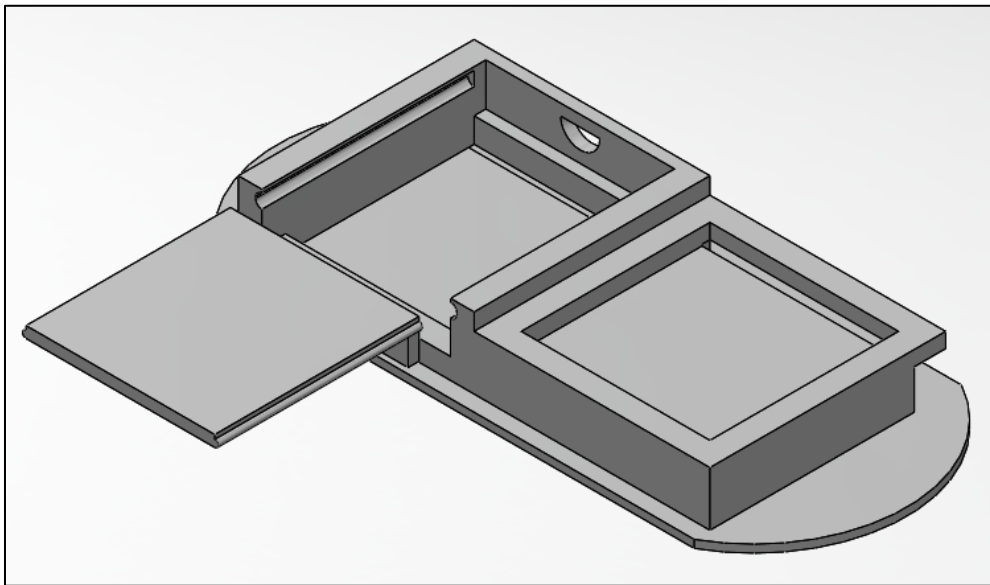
FFF 3D printed housing for pressure and shear sensors. Pressure sensor housing is represented with the bottom chamber and the shear sensor housing being the top chamber with sliding lid.
